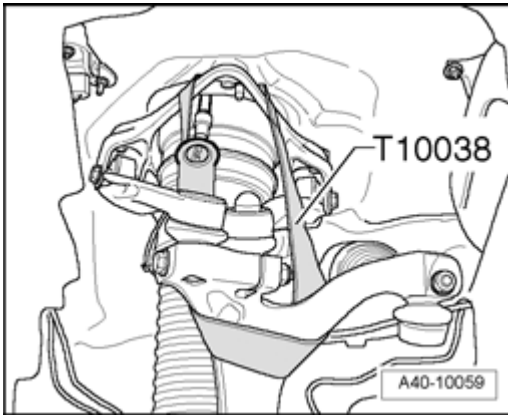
Tying Up Wheel Bearing Housing With Tension Strap T10038
